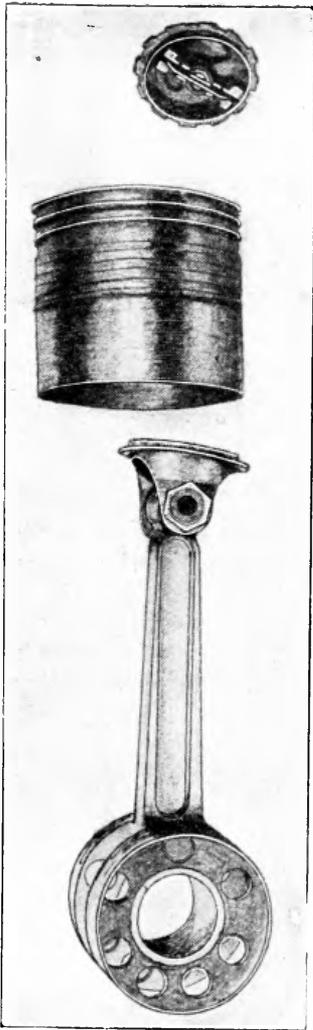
The piston main connecting rod, and inlet valve of the Gnome engine.
